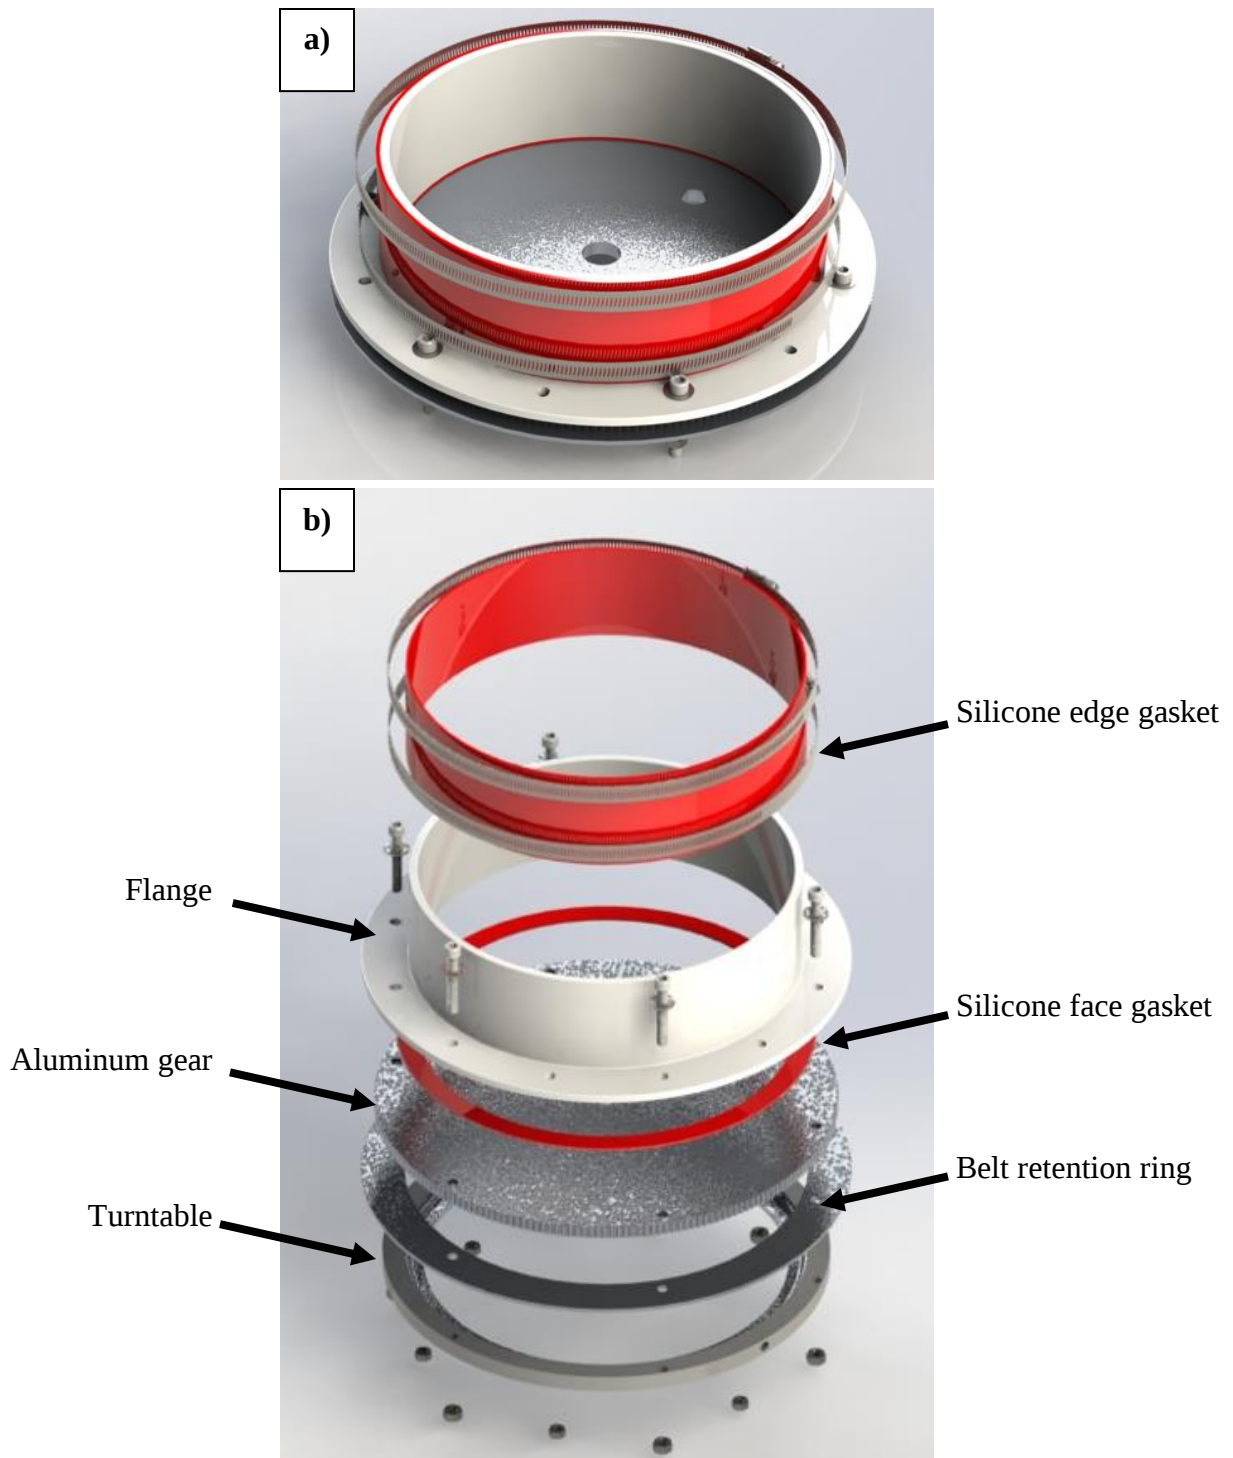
a) Assembled concentrator base; and b) exploded view of concentrator base with labels.
